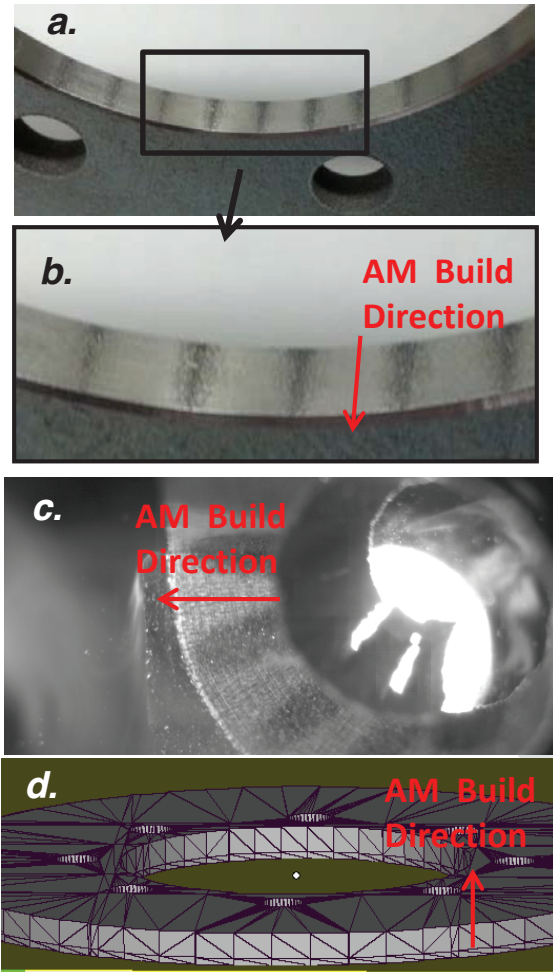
a. Lathe turned inner diameter of the workpiece showing light/dark striations. b. Enhanced view of striations on the workpiece. c. Striations appearing on the chip surface in high speed video (Test 3, frame 3154) and the relation to the build direction. d. STEP file of disk showing tessellated facets on the inner and outer periphery.
